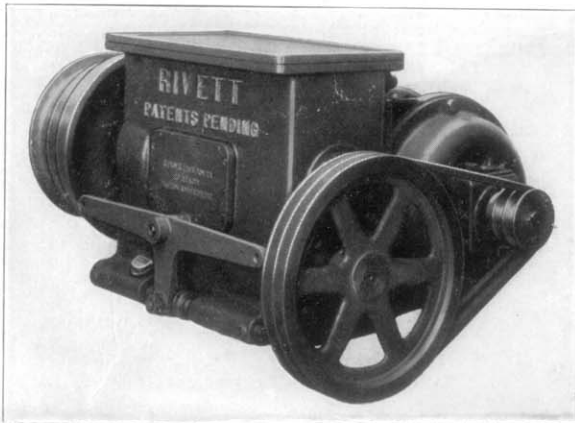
Speed Box Motor Drive (Patents Pending)
